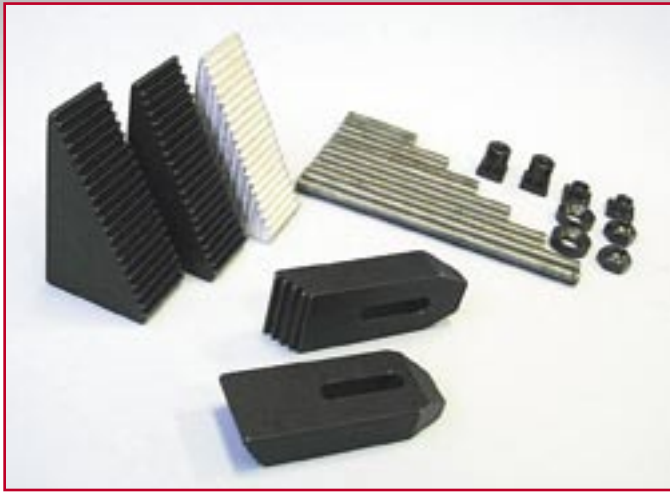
A step block set offers a quick and versatile way to clamp parts to the mill table.
